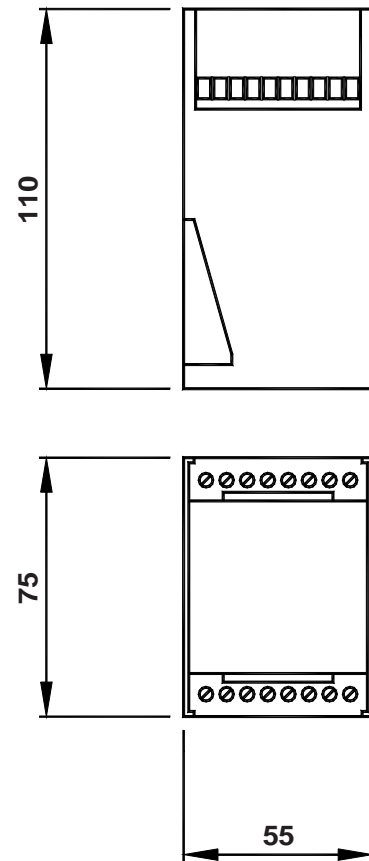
Dimensions of PSSU/1 and PSSU/2 control units
